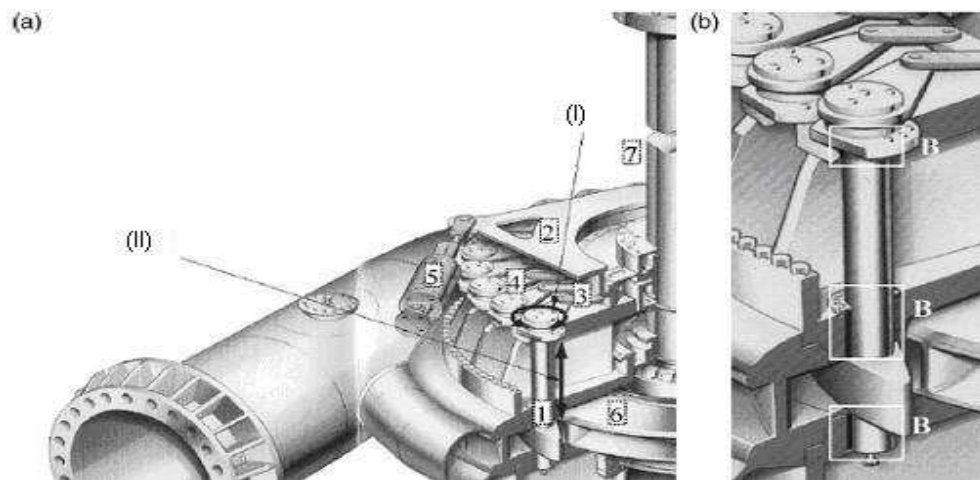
1: Cross-section of (a) Francis water turbine with guide vane: 1.guide vanes; 2.central ring; 3.link; 4.lever; 5.hydraulic pistons; 6.turbine runner; 7.shaft; (b) guide vane support: B, bearings [8].
